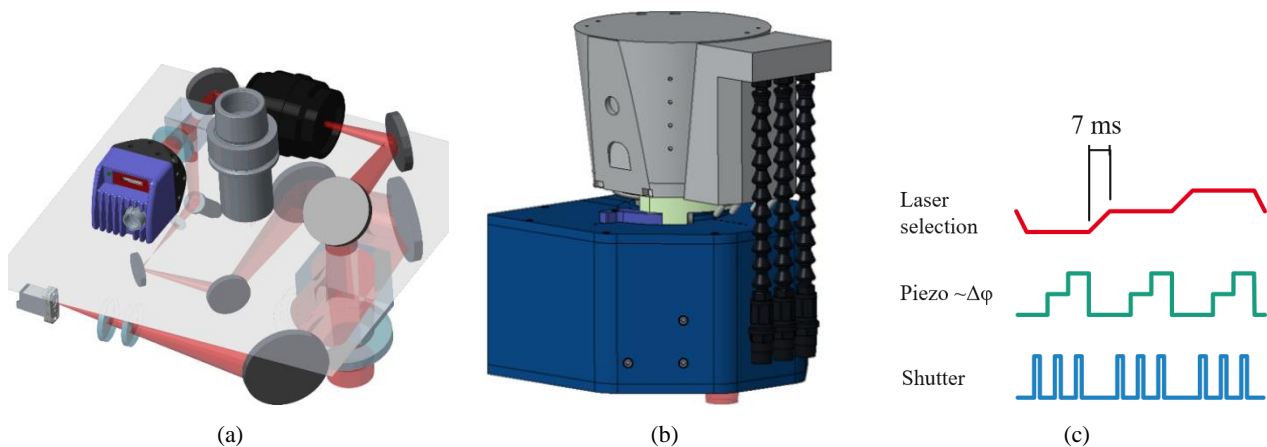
(a) HoloCut sensor design: 3D layout of beam path including separation plane with reference beam guidance on the bottom plane and object beam on the top plane. (b) Schematic integration of HoloCut (blue) into a machine head (grey). A permanently installed stop-block (green) is connected to the sensor's torque bracket (violet) manually with a screw. (c) Data acquisition time series using three lasers and three piezo steps for temporal phase shifting. In total, nine camera images are acquired.
